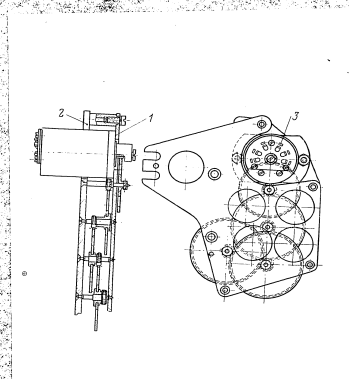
AMM-0,5 Electric Motor with Reduction Gear
